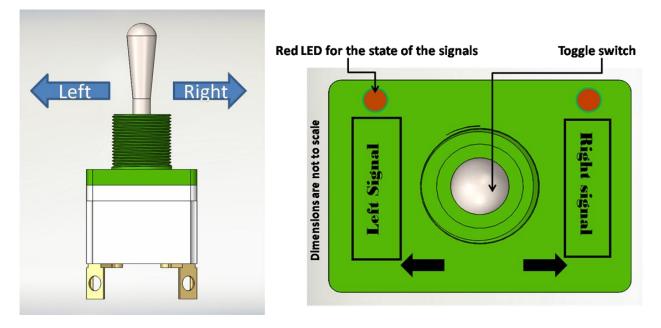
Front view and a top view of the user interface based on a SPDT SolidWorks design [18]
